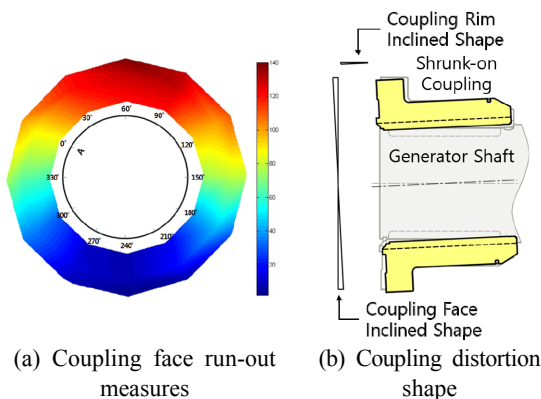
Run-out of coupling face and distortion of shrunk-on coupling
